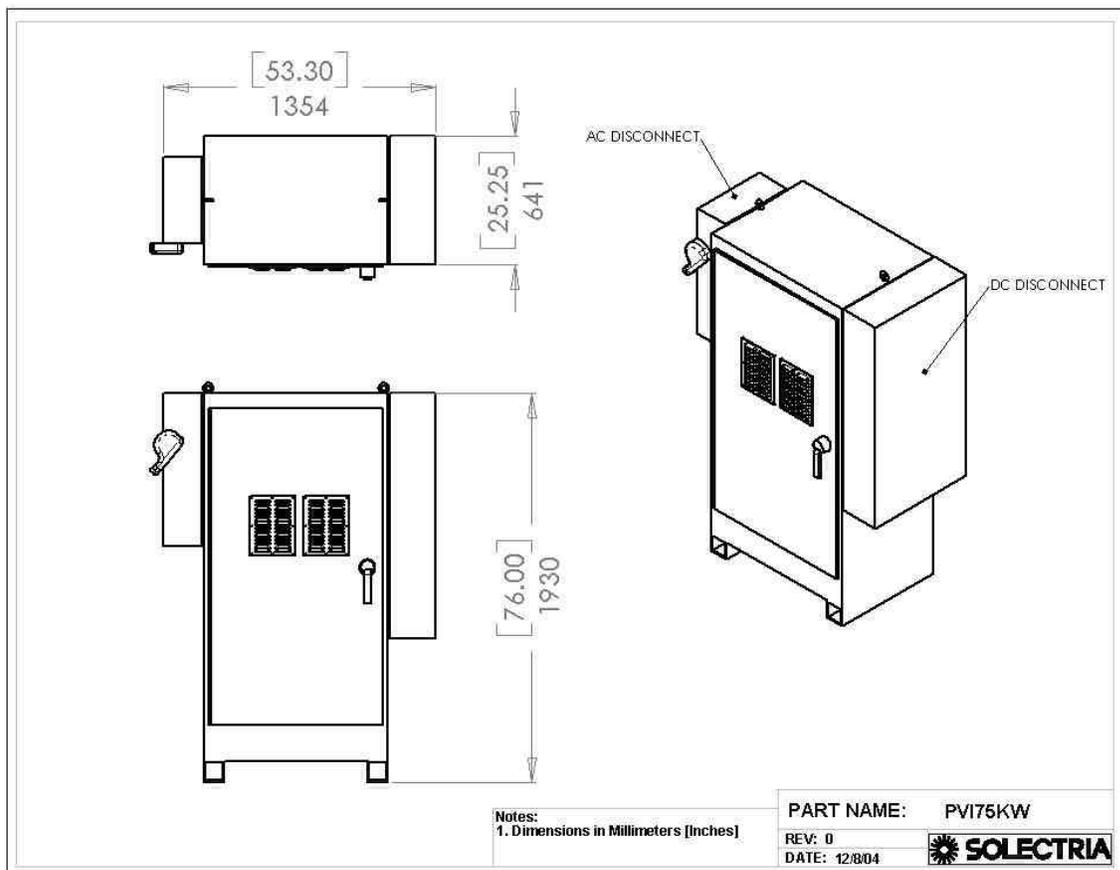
Dimensions to mount the inverter (480VAC version shown in diagram).
